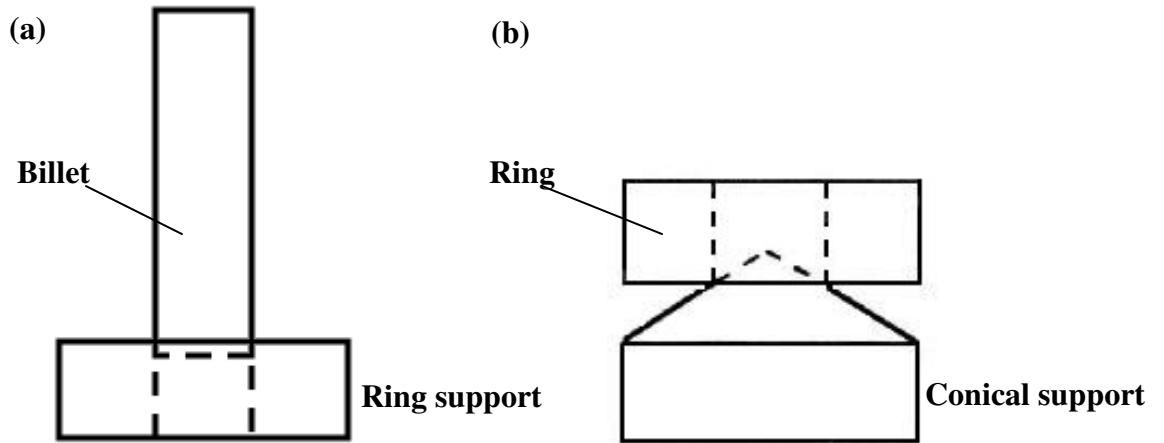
(a) Ring support for billets and (b) conical support for rings in order to prevent the coating sticking on other surfaces.
